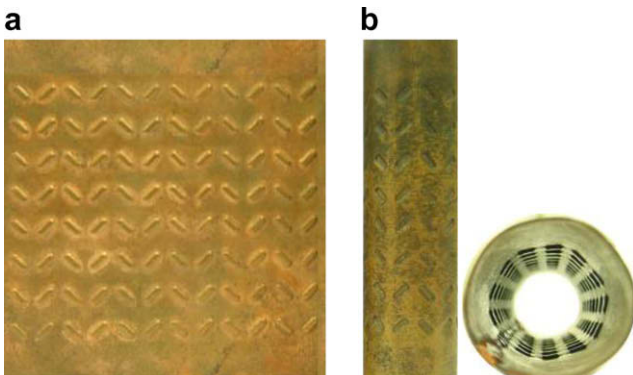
Pictures of a manufactured DDIR tube. (a) DDIR plate (b) DDIR tube.
